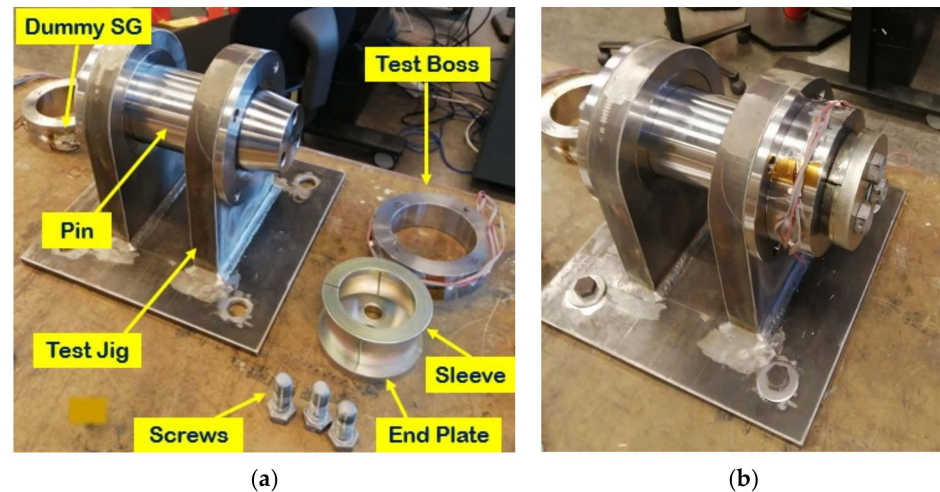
Experimental setup with active-dummy gauge technique. (a) Disassembled EPS joint components (b) Assembled EPS joint components.
